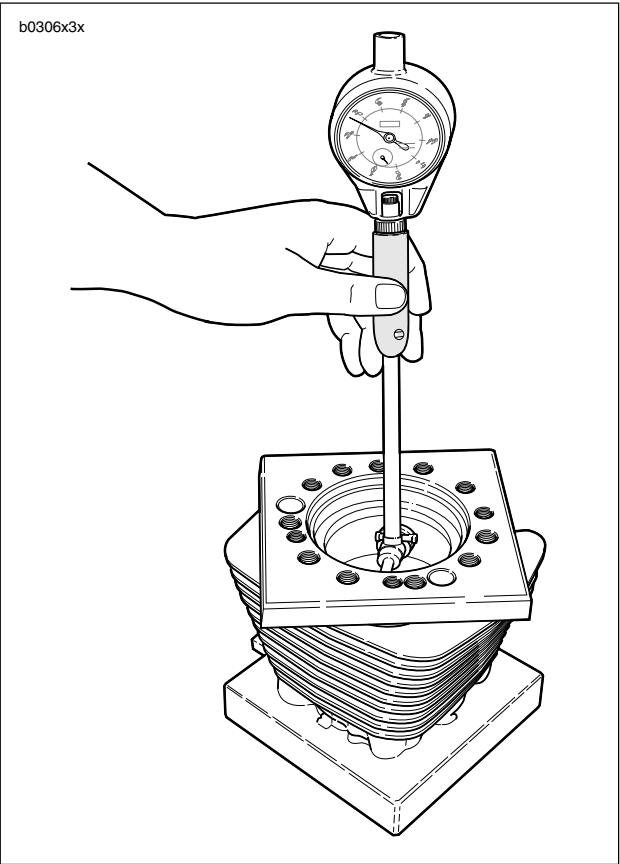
Measuring Cylinder Bore Using Torque Plates (Part No. HD-33446B)
